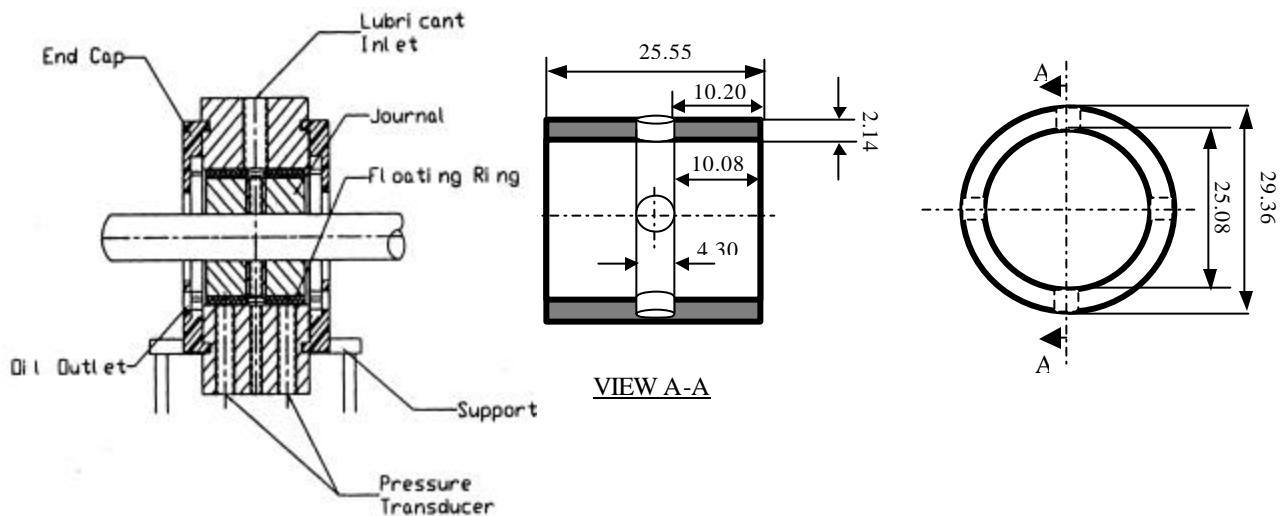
Detail of *FRB* assembly and floating ring dimensions (mm).
